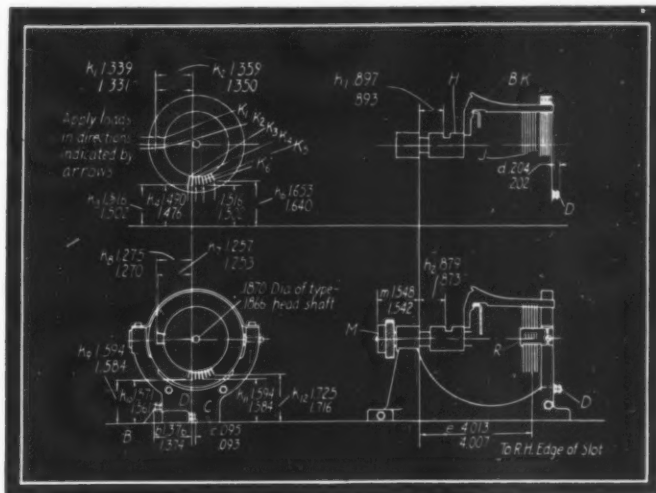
(Left)—Setting jig used for checking control lever unit. Fig. 8—(Below)—Permissible limits allowed for combination unit
